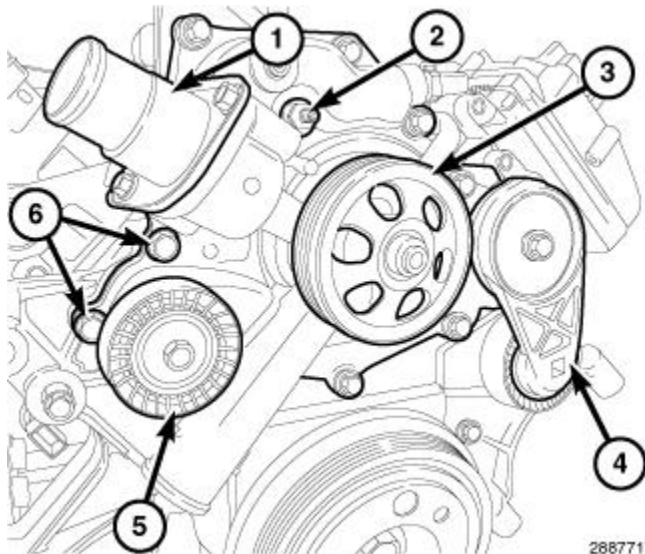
Thermostat Housing, Water Pump, Belt Tensioner, & Idler Pulley
